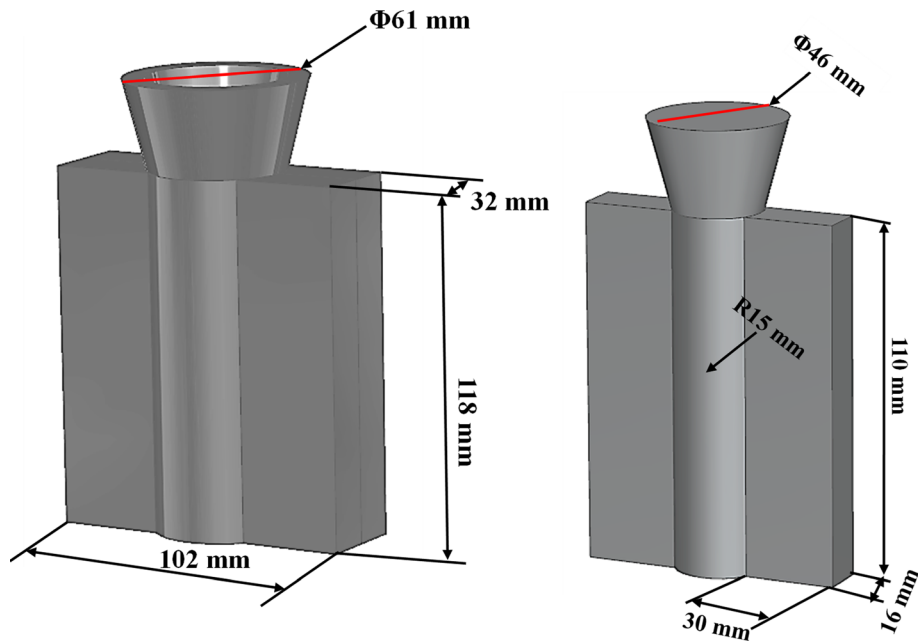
Schematic diagrams of the steel mold and ingot casting: (a) steel mold (b) ingot casting
